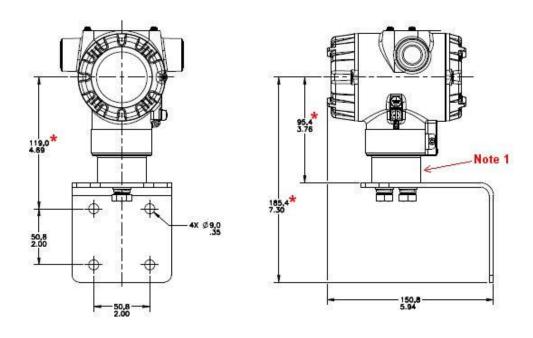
STT850 with adapter housing - Horizontal Wall Mounting
